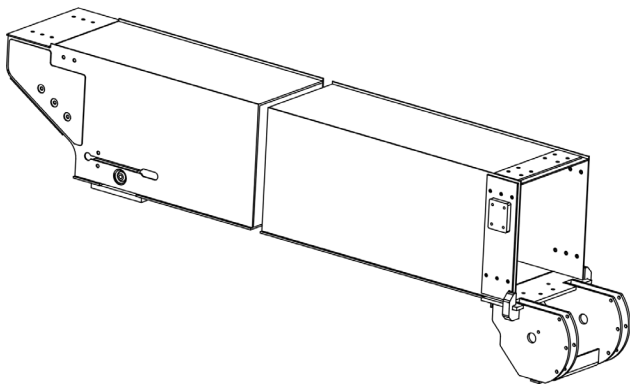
Boom Assembly Torque Values - Sheet 4 of 4
